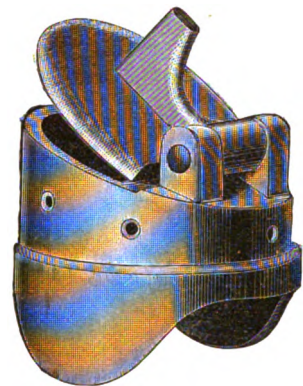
, page 111, should be 231 A, being a common valve with iron hinge.
